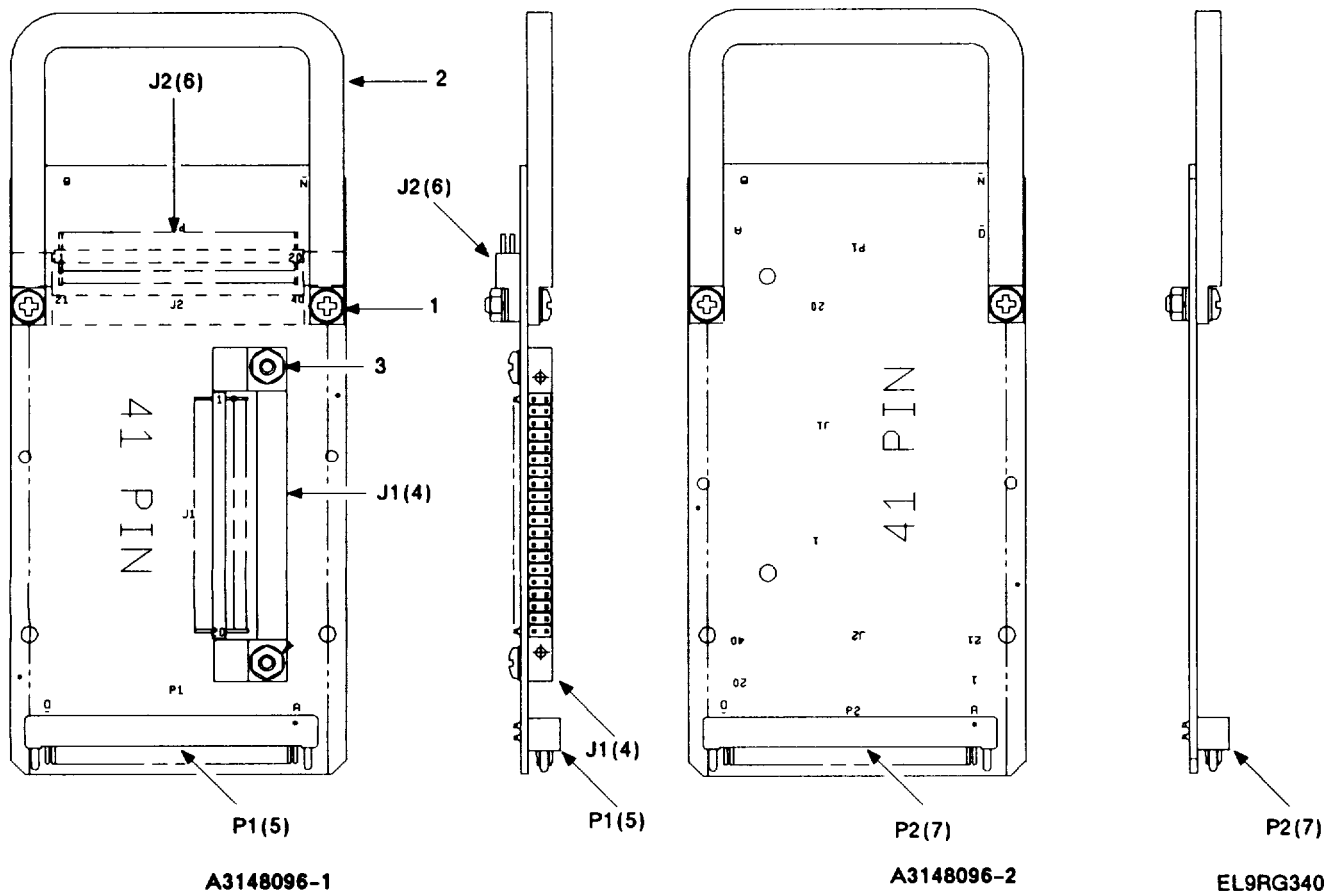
Electronic Test Extender Cards-41 Pin Connector Component Layout
